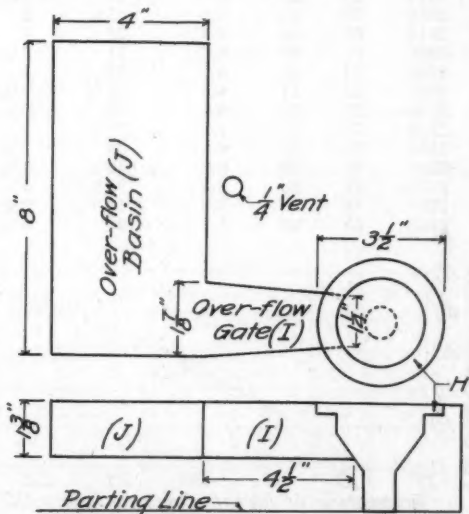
POURING WELL, OVER FLOW GATE, AND BASIN ASSEMBLY.
